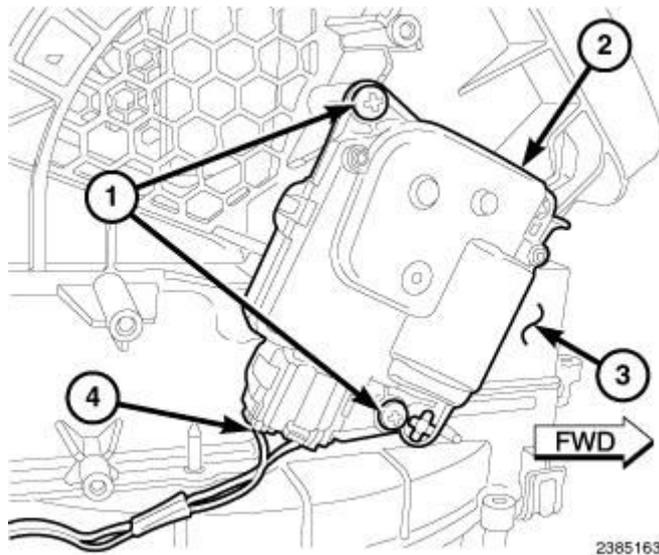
Recirculation Door Actuator, HVAC Air Inlet Housing, Wire Harness Connector & Screws
